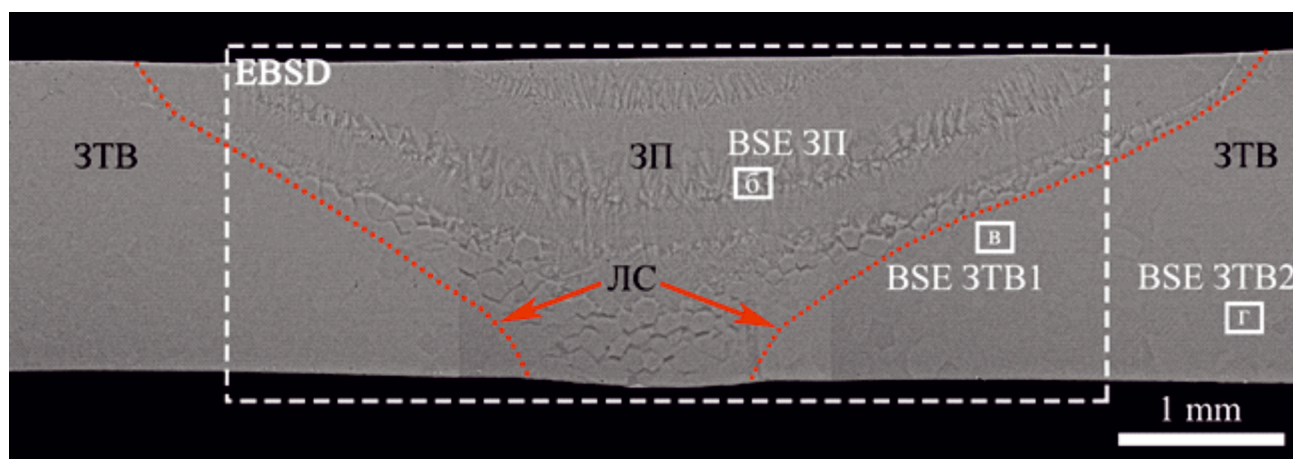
Appearance of Ti–Al–Nb–(Zr, Mo)–Si alloy weld joints produced by GTAW under:
